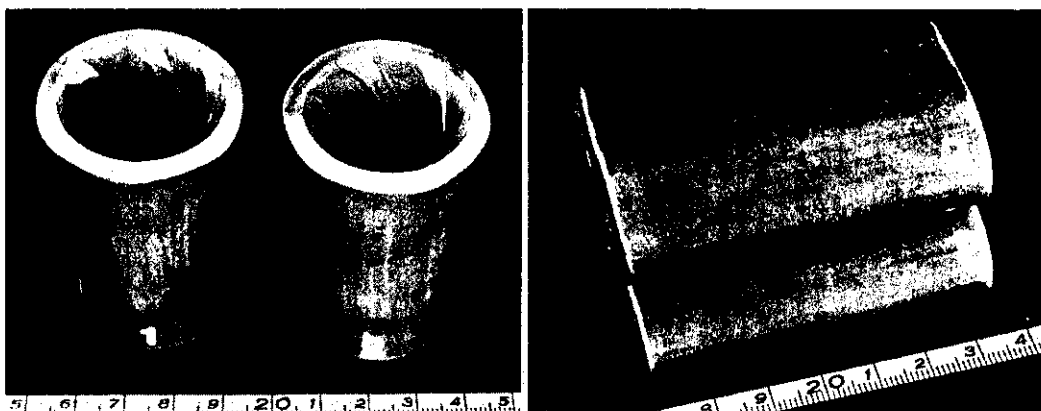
Views of specimens after flattening test (right) and flaring test (left)
